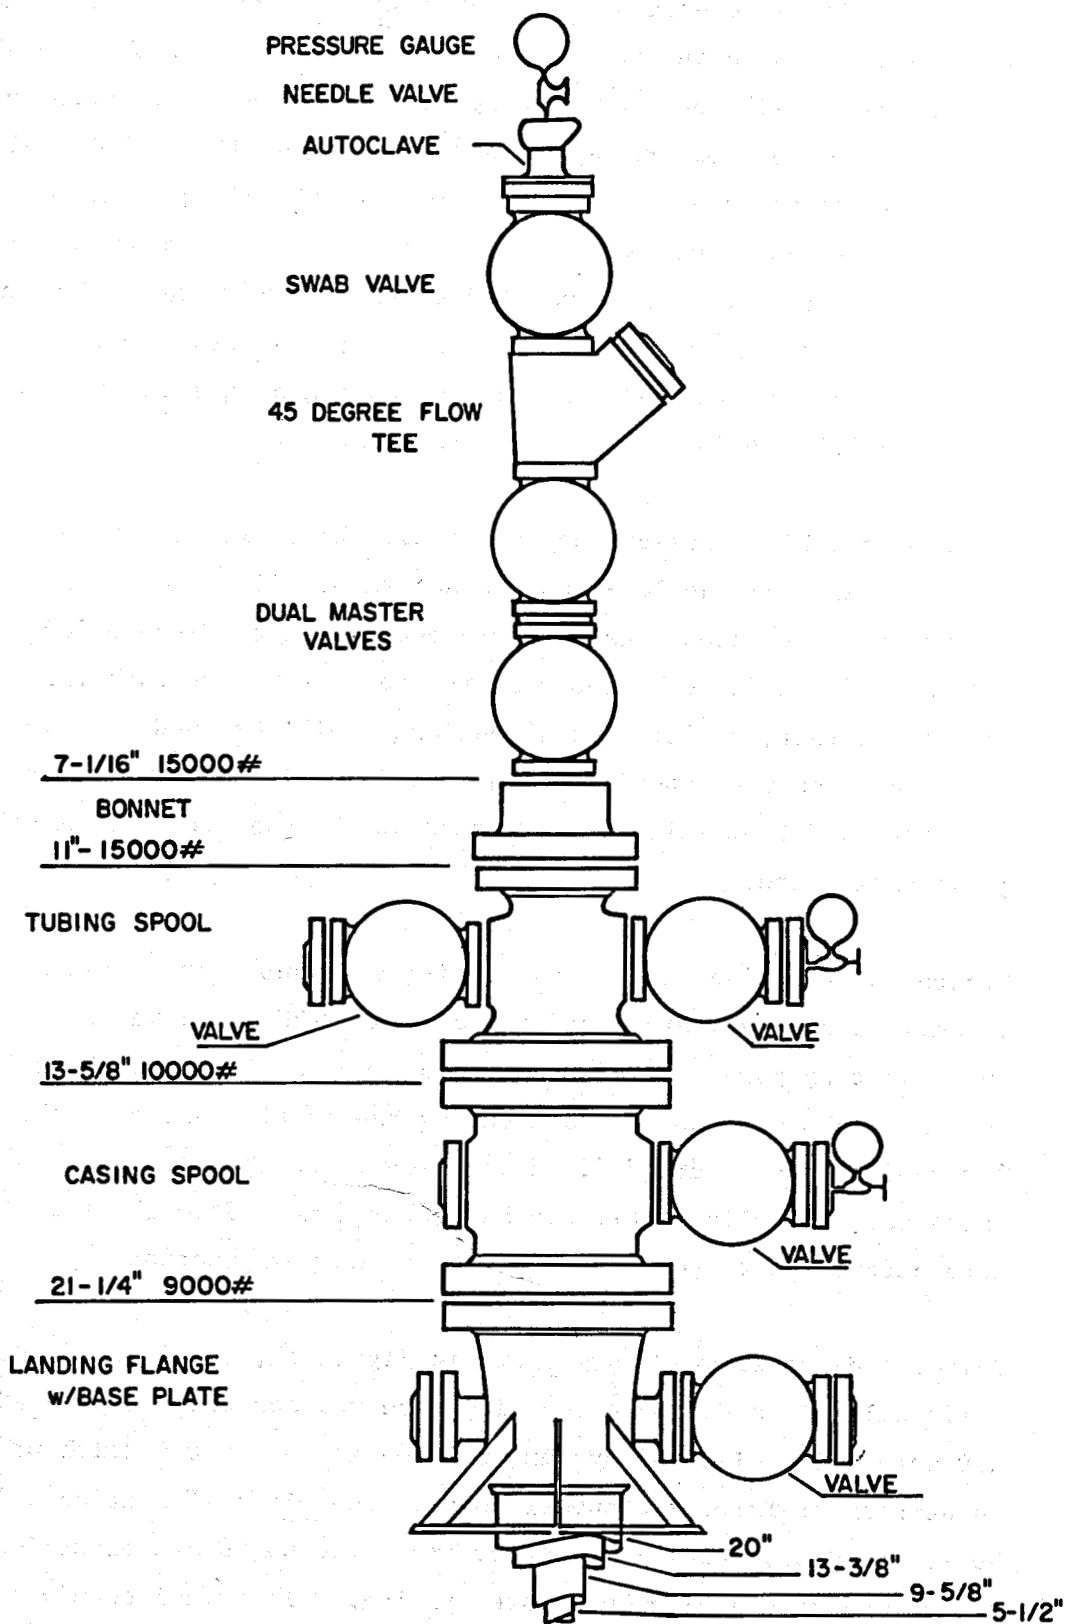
TEST WELL -- WELLHEAD GCO-DOE PLEASANT BAYOU NO. 1 WELL
